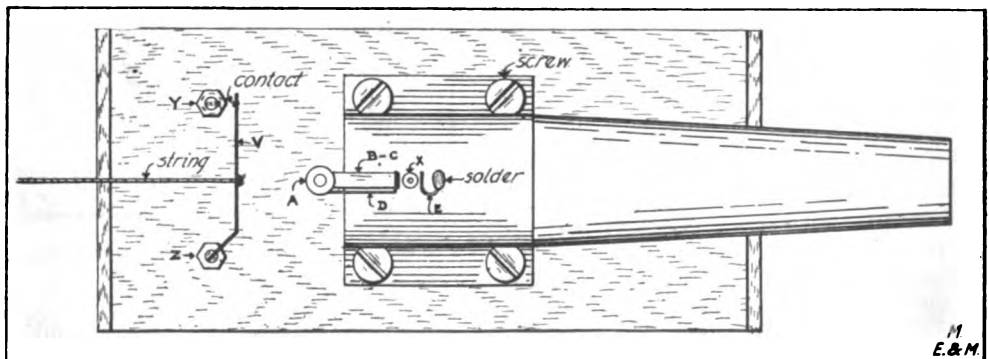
TOP VIEW OF THE FINISHED CANNON, SHOWING THE ARRANGEMENT OF THE DIFFERENT PARTS FOR IGNITING THE CHARGE
